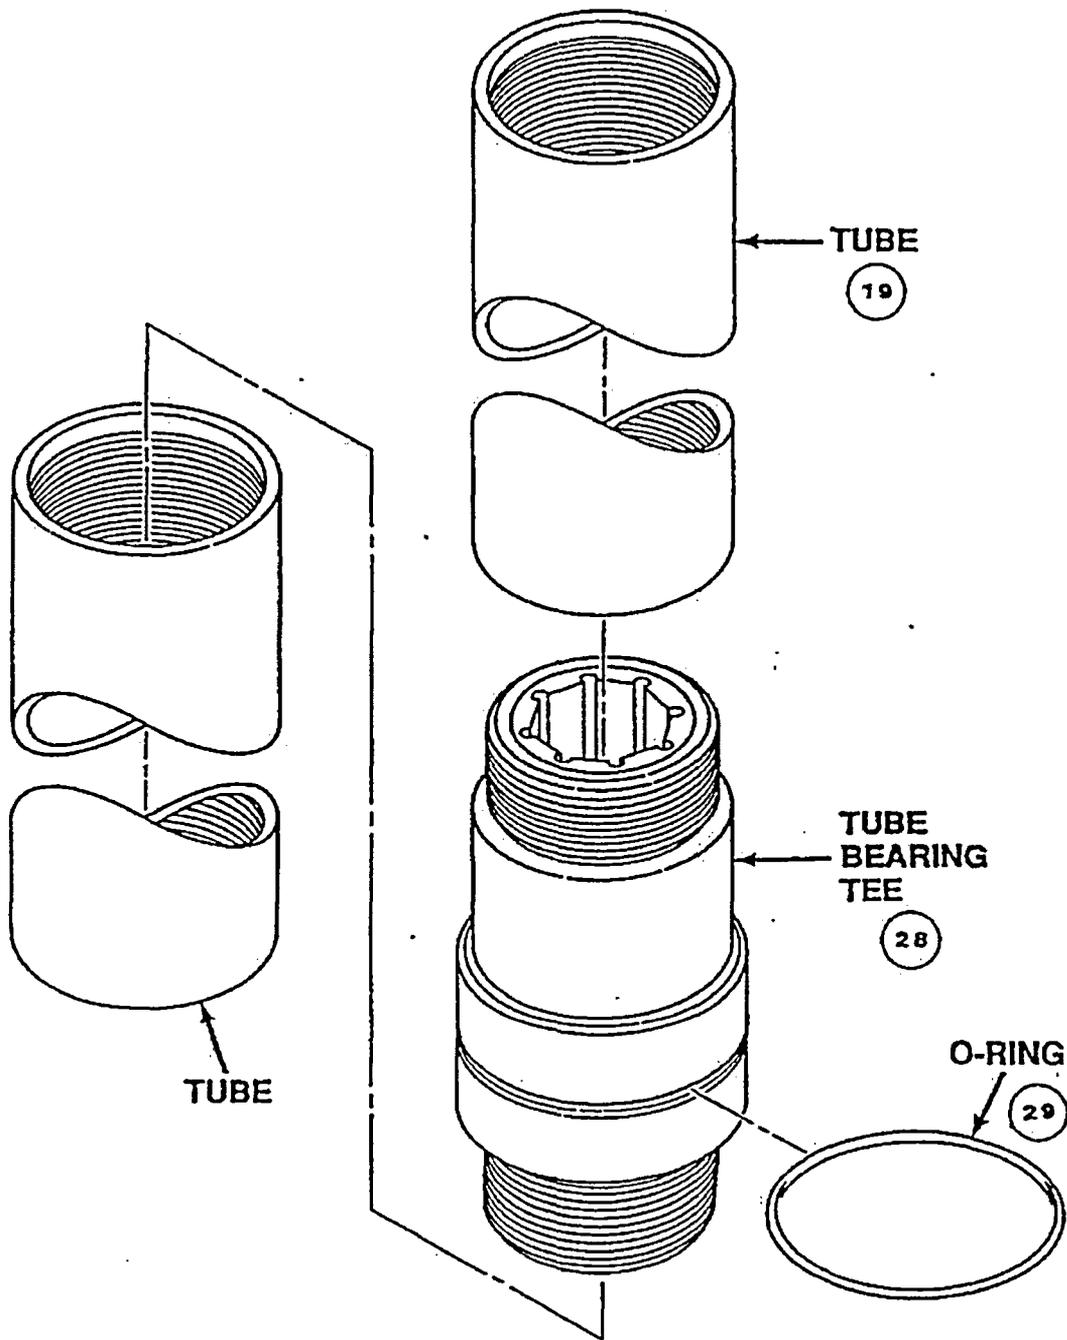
TUBE (INNER COLUMN) ASSEMBLY (TYPICAL)
